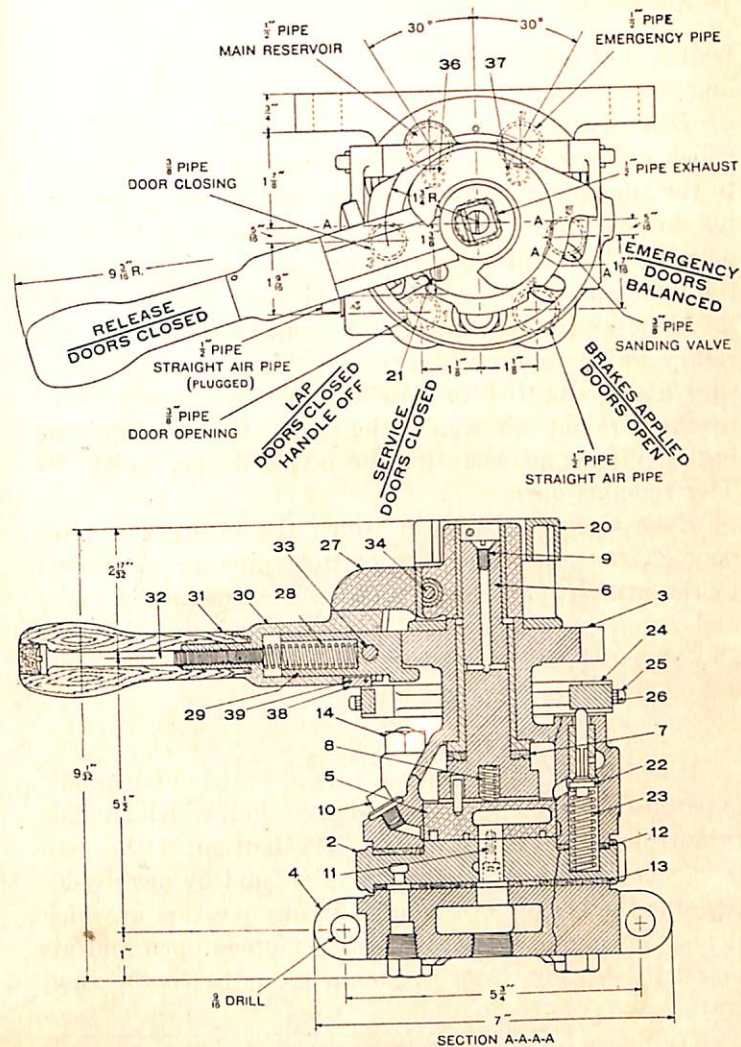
M-28 Brake Valve, Plan and Sectional Views
